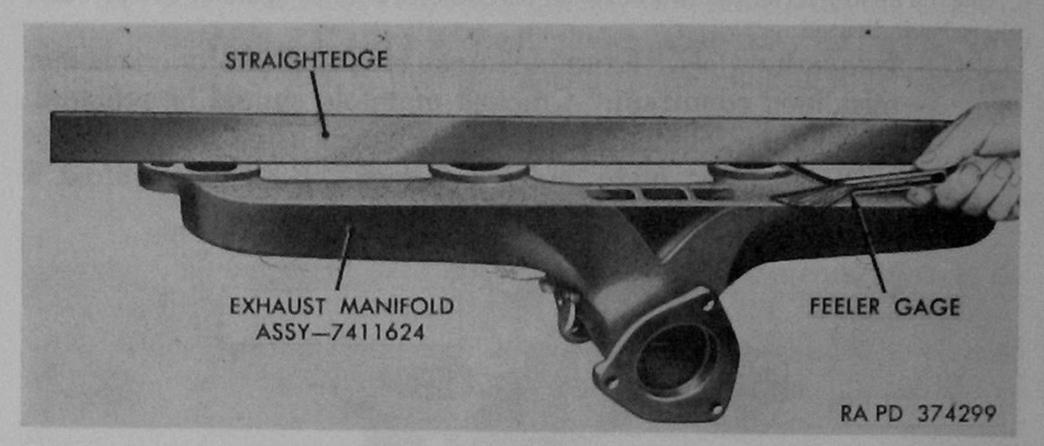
Checking alinement of manifold flanges—engine_assemblies 7411599 and 8329440.
